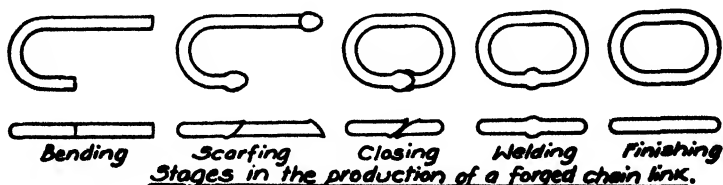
Stages in the Production of a Forge-Welded Chain Link.
